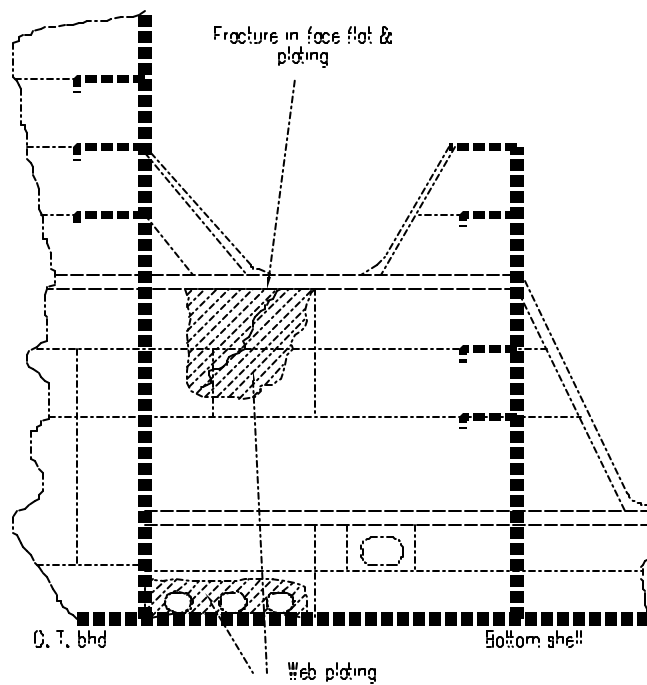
Fracture at toe of web frame bracket connection to stringer platform bracket.
